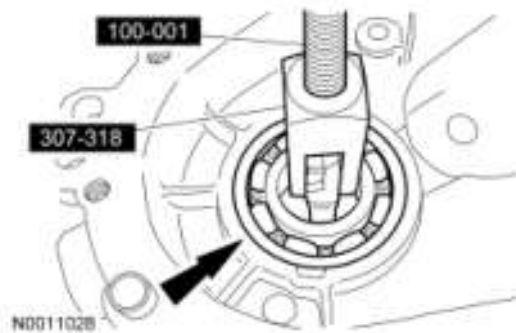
Locating Front Output Shaft Support Bearing And Special Tools
